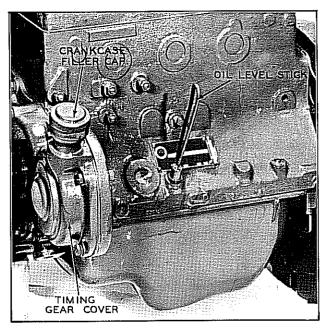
Crankcase...location of Fill Cap and Oil Level Dipstick.
